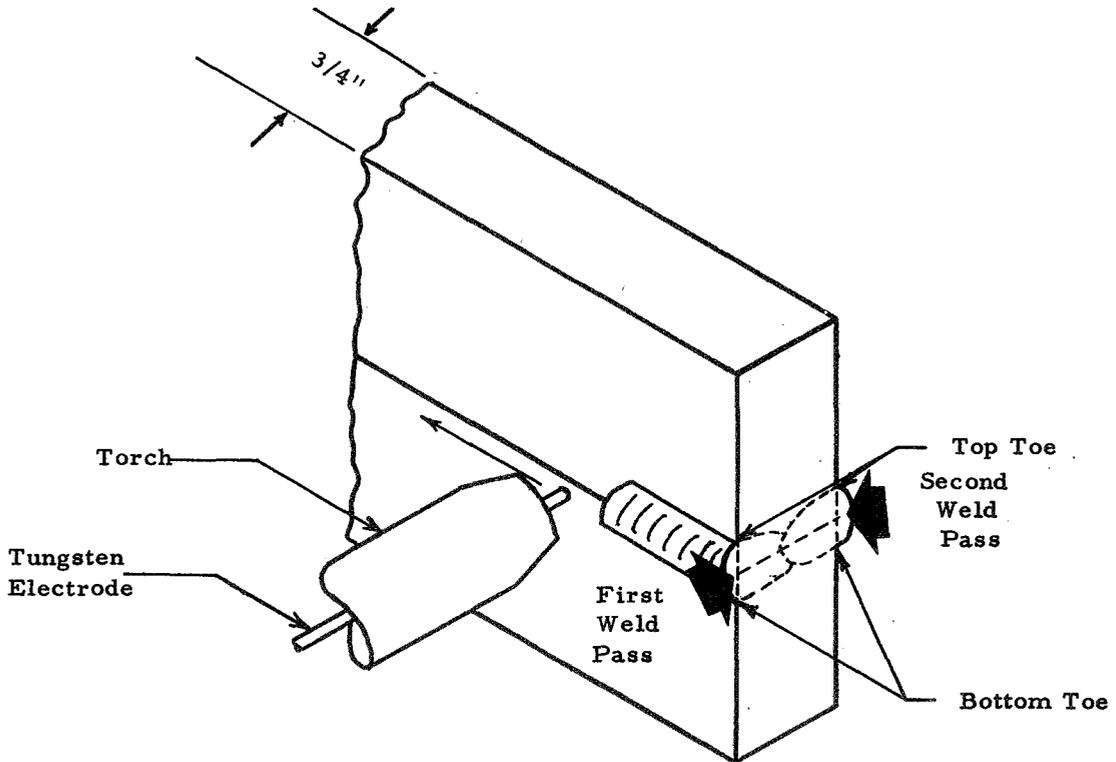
Schematic of Tungsten Inert Gas, Horizontal Welding of 3/4 Inch, 2219-T87 Aluminum Panels
